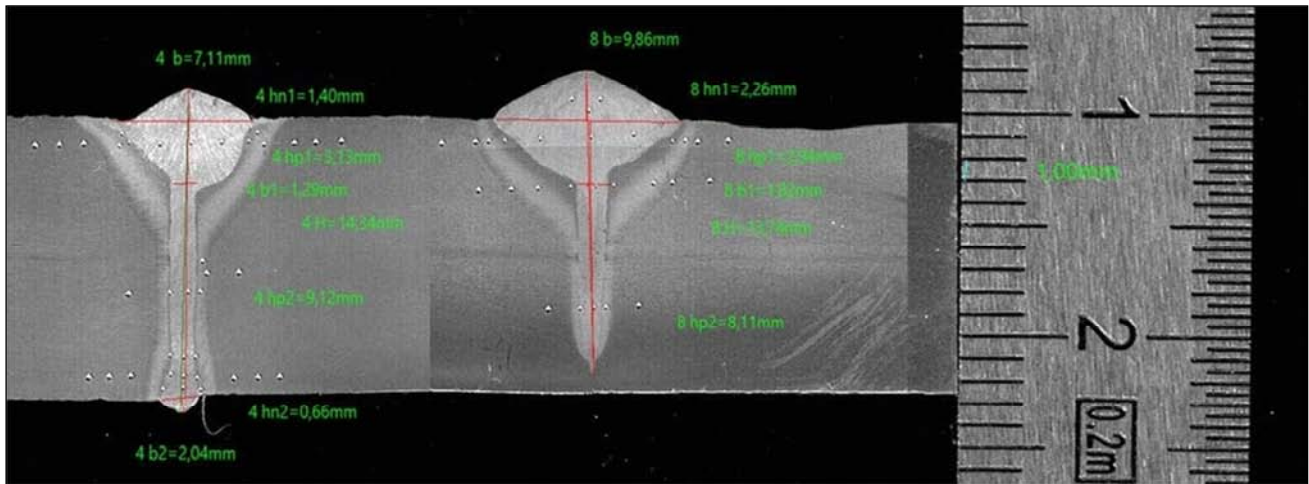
Cross-sections of HLAW: a) Weld no. 4; b) Weld no.8
